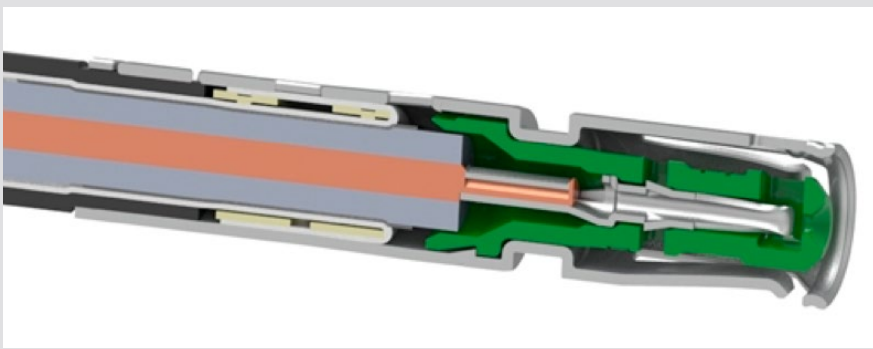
Cut-away of the MATE-AX RTK031 crimped receptacle terminal and cable
